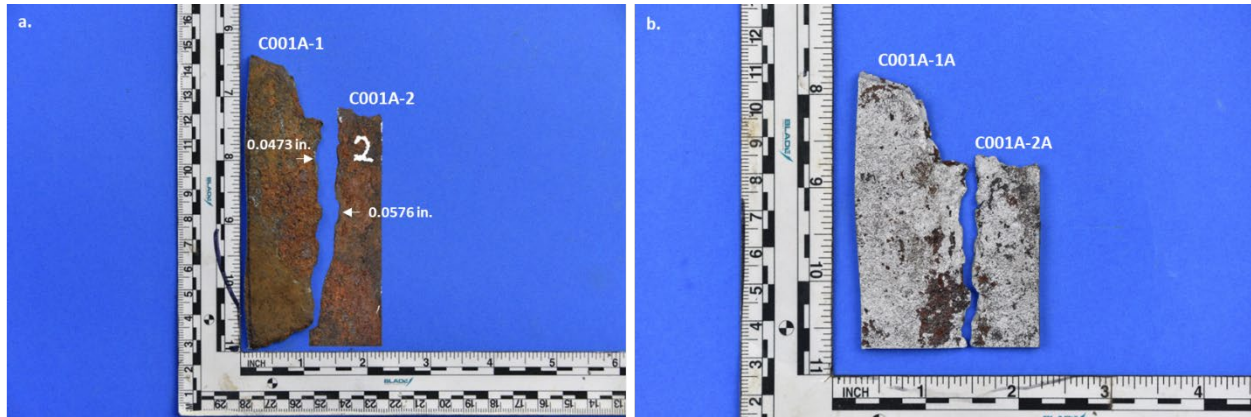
(a) Location of Thinnest Regions in C001A-1 and C001A-2 and (b) Matching Axial Fracture Surfaces
